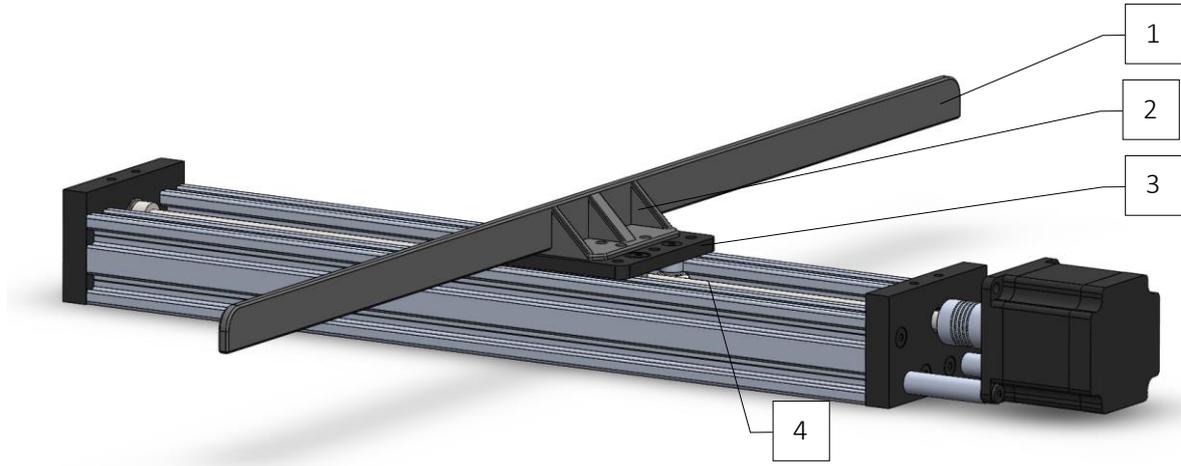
Modified linear rail guide (C-Beam linear actuator). 1 – Pusher with 2 – ribs; 3 – platform; 4 – shaft [13].
